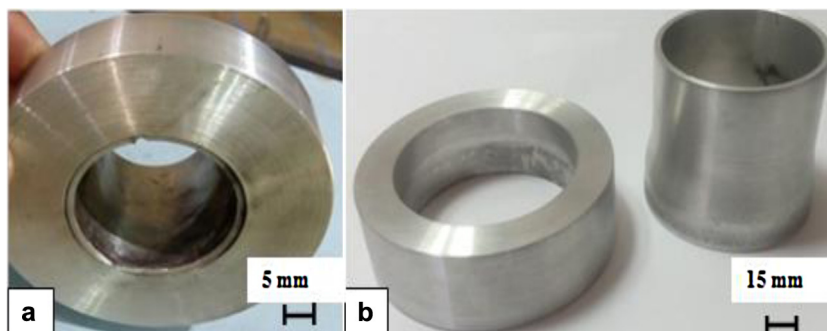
(a) 25 mm diameter welded tube-flange that passed the drop, pull and peel off tests. (b) 50 mm diameter tube-flange that failed in the drop and pull out tests.
